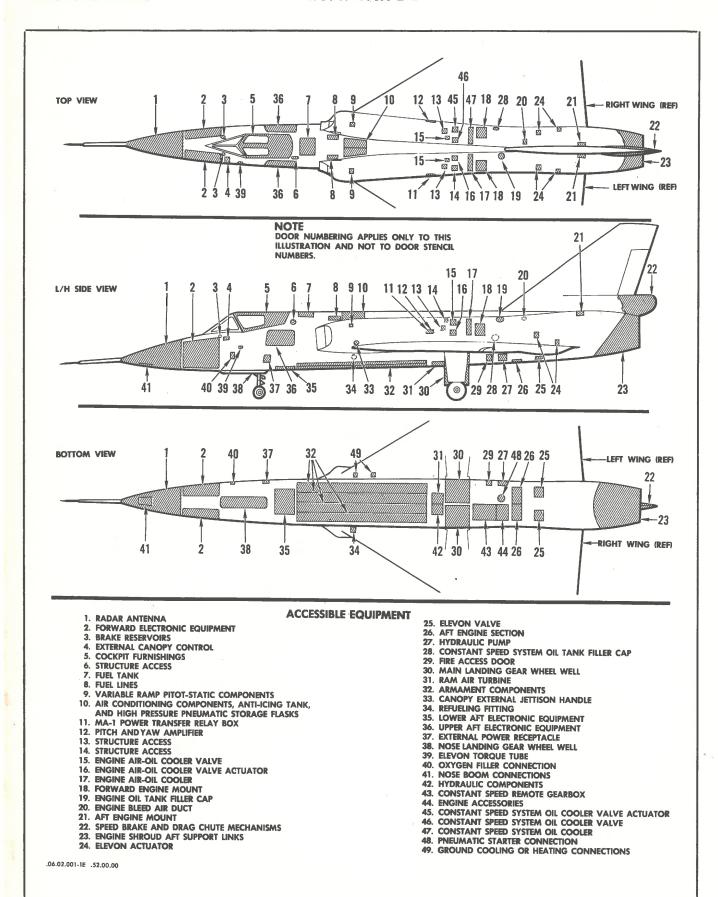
Access and Inspection Provisions, F-106A Fuselage
